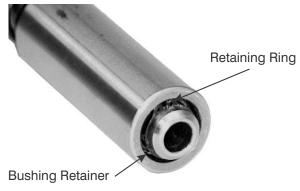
Retaining Ring on Valve Stem inside the Valve.
